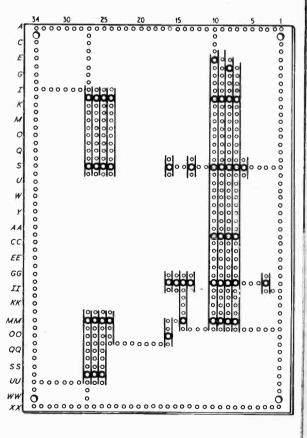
Component layout and wiring of Sample and Hold Board
